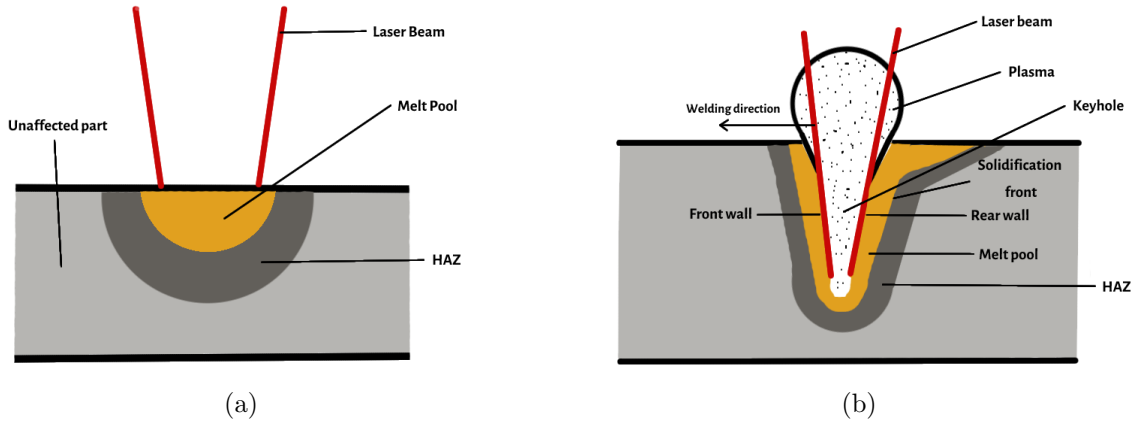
Basic principles of (a) the LBW modes thermal conductive welding, and (b) keyhole welding.
